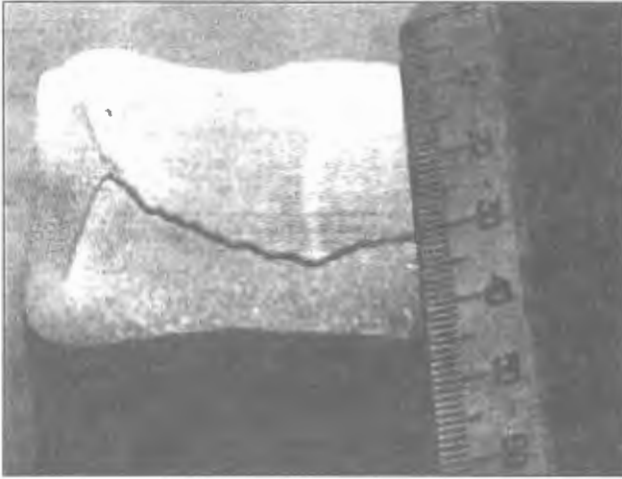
Macrosection of a two-sided weld (the cut is made along its axis)
